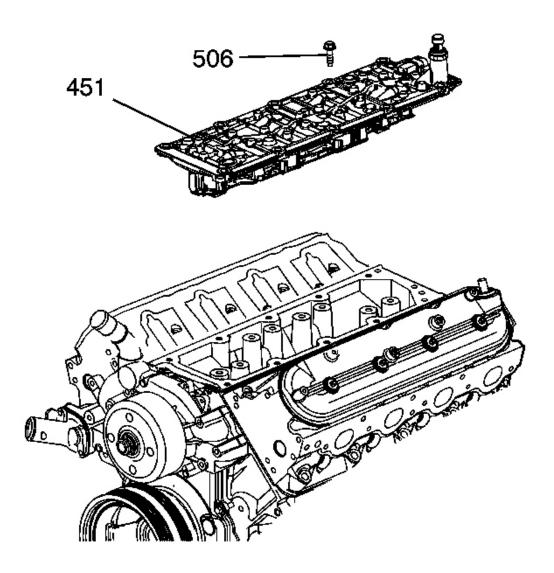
View Of Valve Lifter Oil Manifold Courtesy of GENERAL MOTORS CORP.
